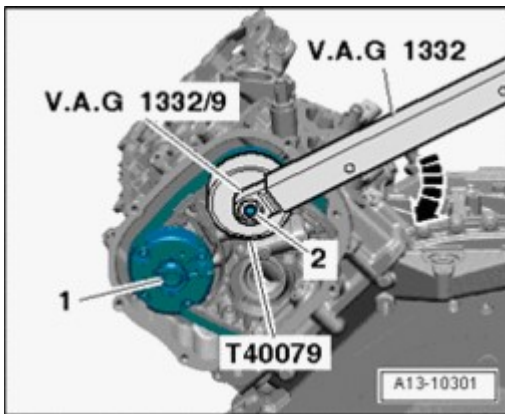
Positioning Adapter T40079 On Intake Camshaft Adjuster At Left Cylinder Head
